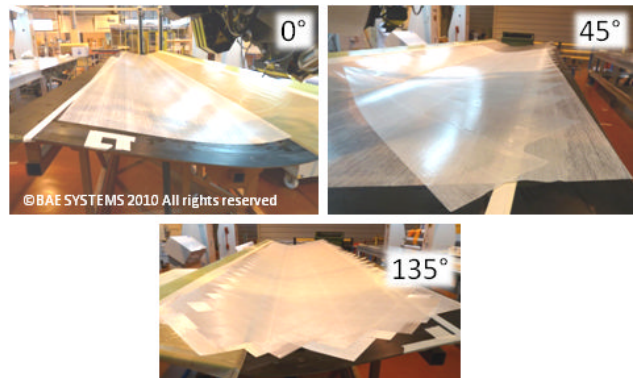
ATL lay-up achieved over a curved 7m representative wind turbine blade mould tool
